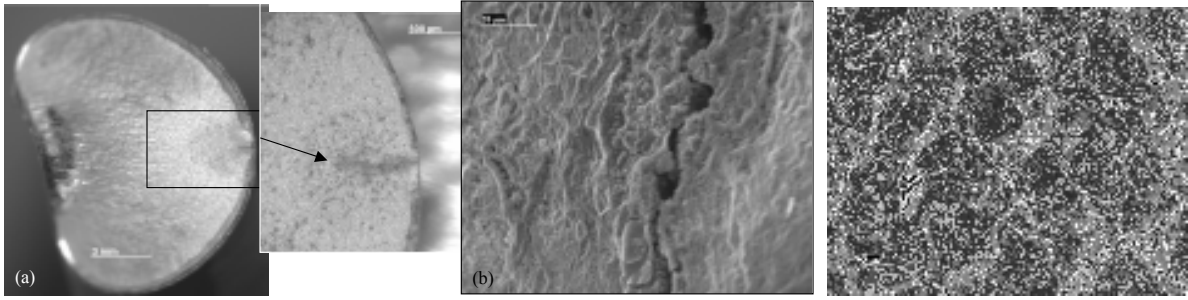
(a) small magnification optical view of the fracture surface of a specimen of 45SCV6 ; (b) SEM observation of a crack containing corrosion products; (c) detail of the fracture surface of a specimen of grade 60SCV7+Nb
